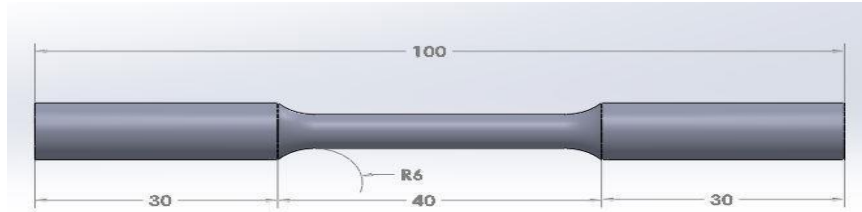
Test specimen size and its dimension considered tensile testing CAD model diagram.
